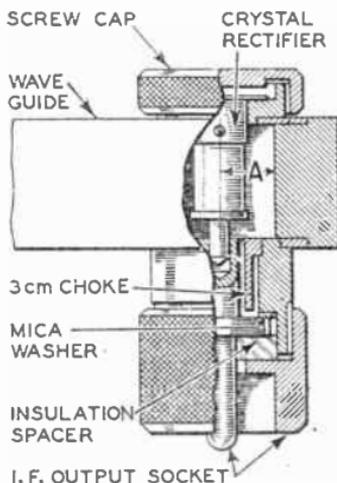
EXPLODED VIEW OF WAVEGUIDE MIXER SHOWING CRYSTAL RECTIFIER.
